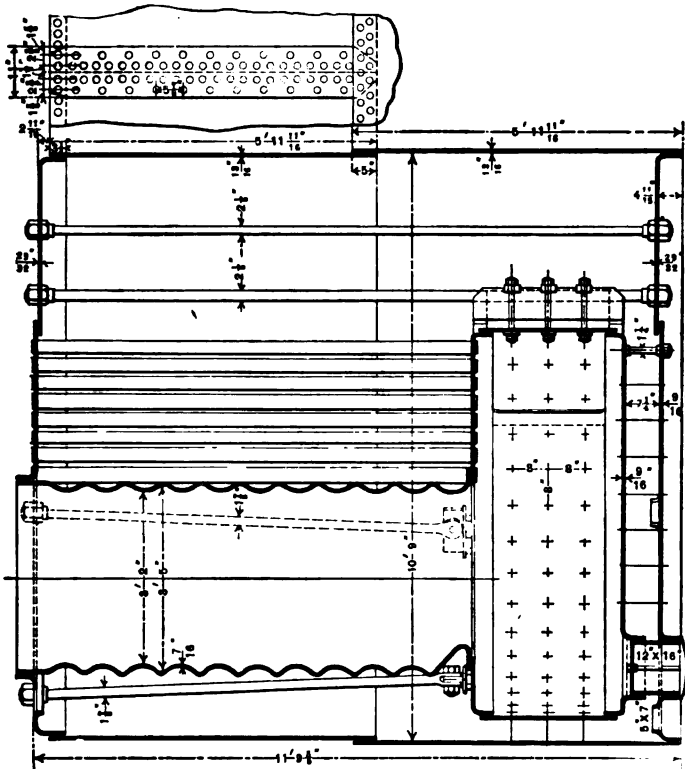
Scotch Boiler, single-ended, with common combustion-chamber.
